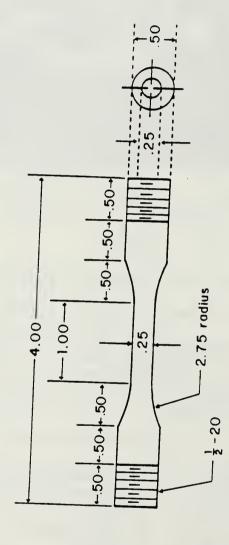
Uniform Gage-length Tensile Specimen Dimensions
